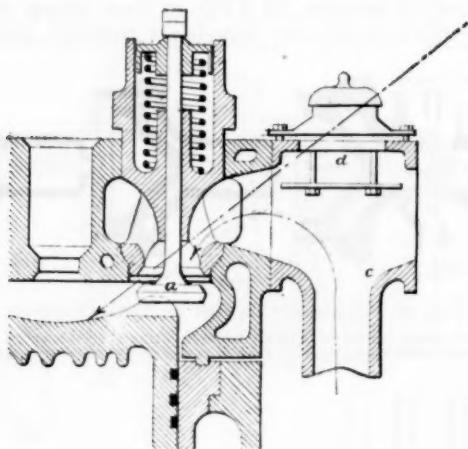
INSPECTION OPENING DEvised BY P. H. MÜLLER
